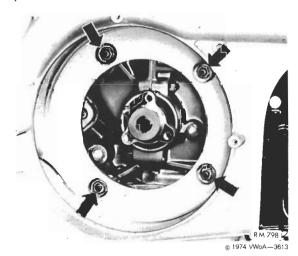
Nuts and studs that hold the fan housing on the crankcase (arrows).
